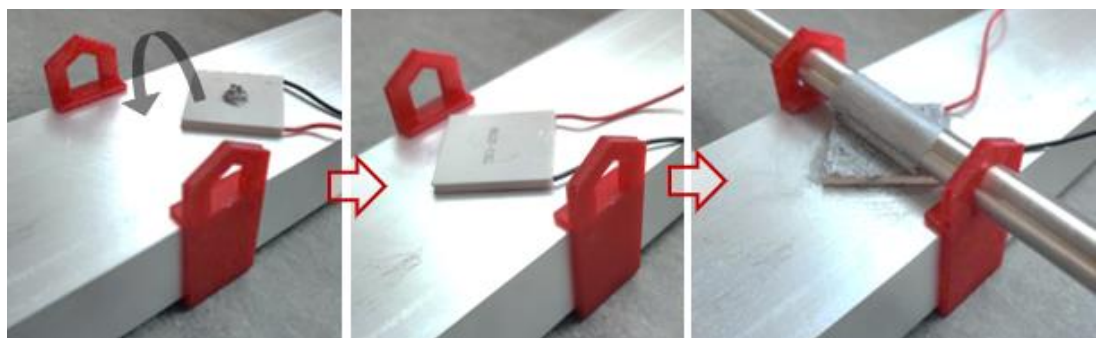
Heatsink TEC and pipe assembly with thermal paste
